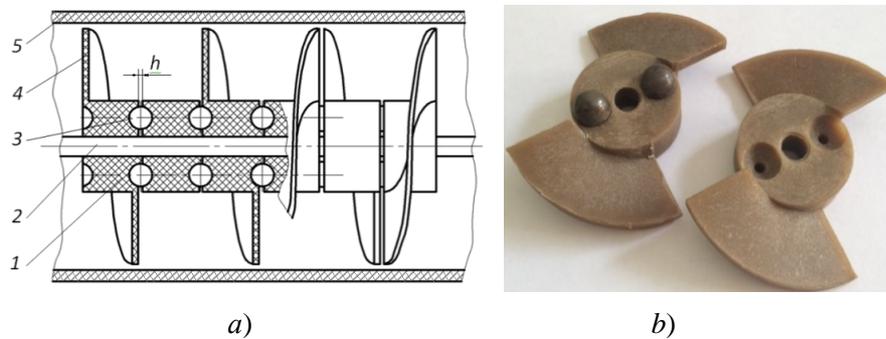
A sectional tool of a screw conveyor: a - construction arrangement; b - general view of separate screw sections
